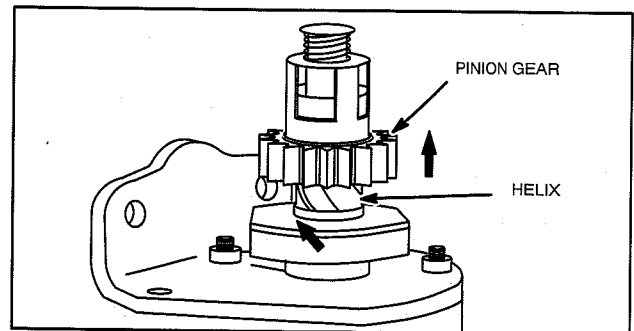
Checking Starter Motor Drive Nylon Pinion
